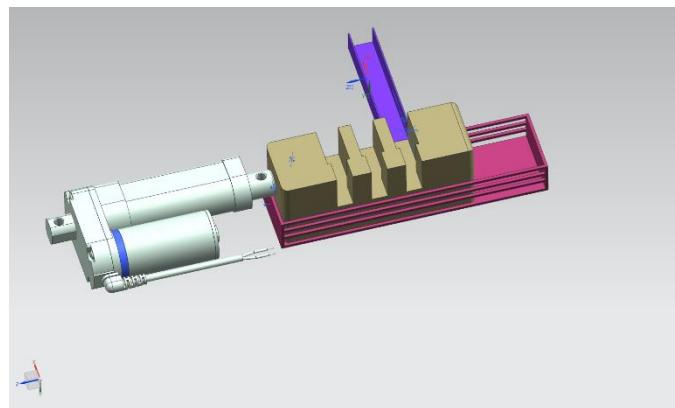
Carrier and actuator position for screw terminal “up” feeder
